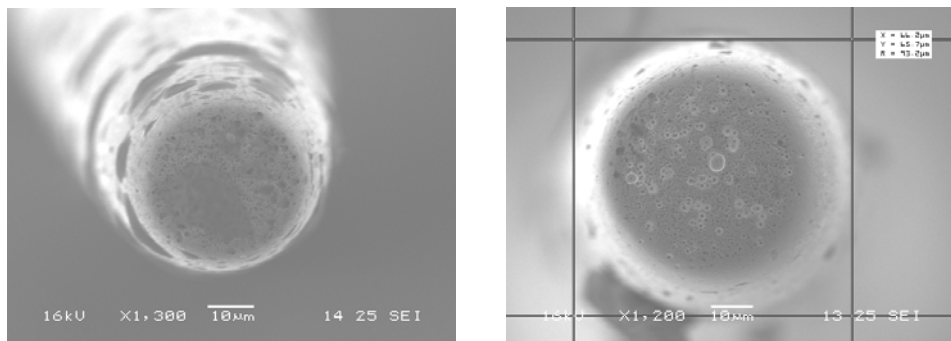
SEM image of the fabricated microtools formed in horizontally to the electrolyte basin during machining.
